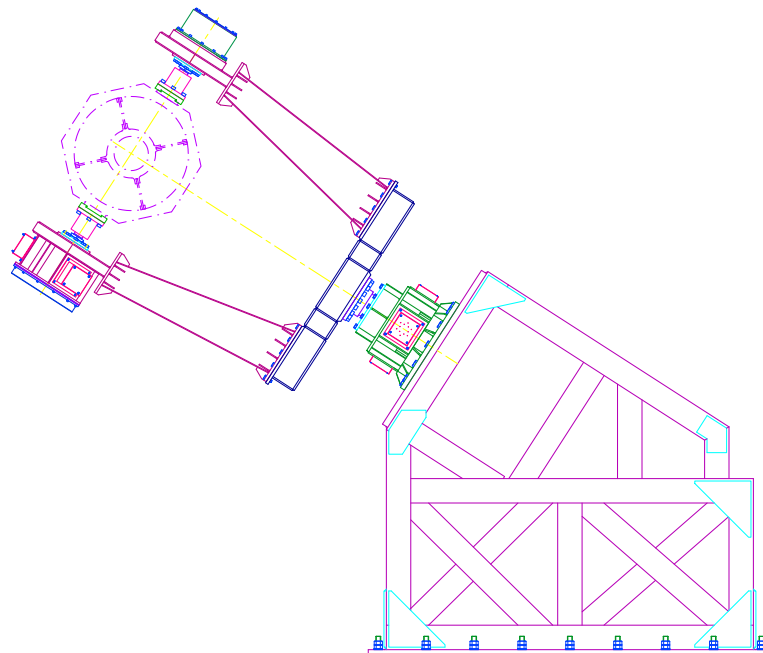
Assembly drawing of the MASS-DIMM telescope in Equatorial mount scheme.
